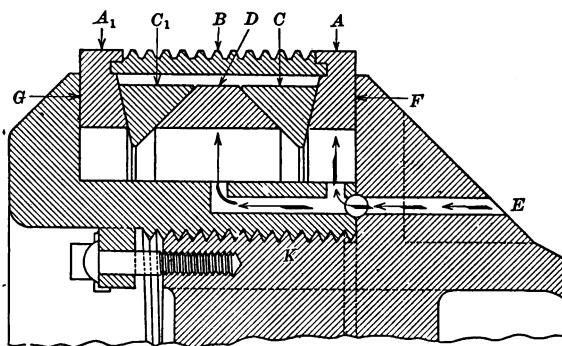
DETAIL SECTION OF "SEMI-PLUG" PISTON VALVE
